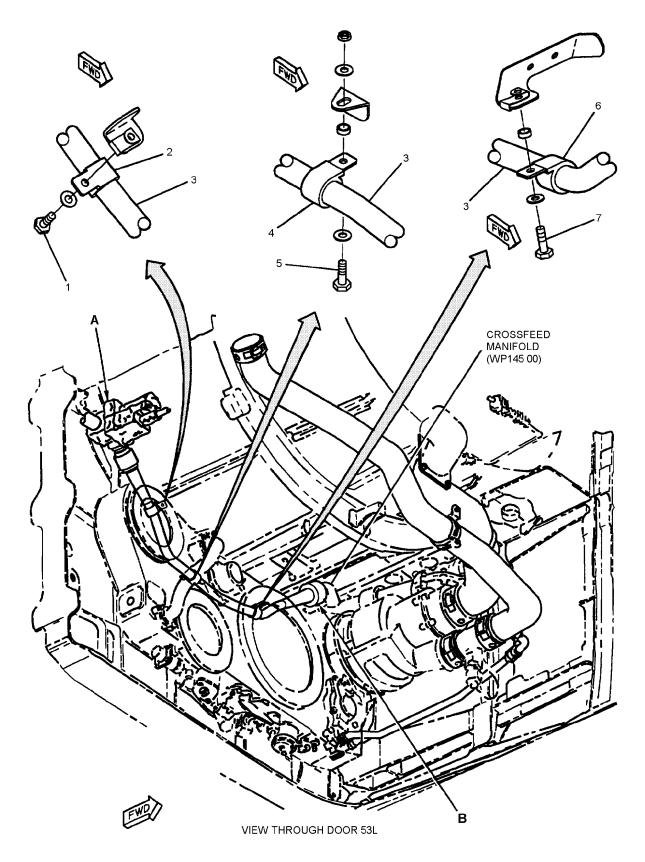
Crossfeed Tube Using Idler (Sheet 1)
